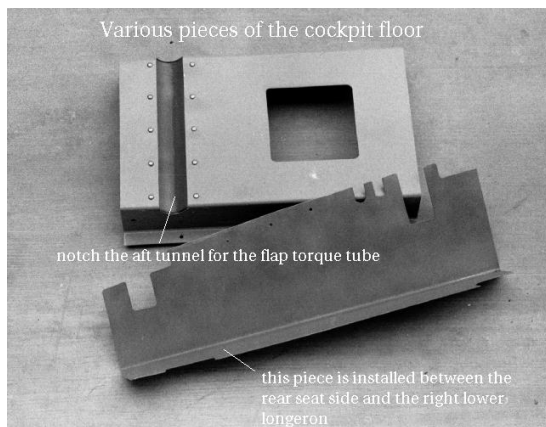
Some examples cockpit floor pieces after fitting and trimming.
